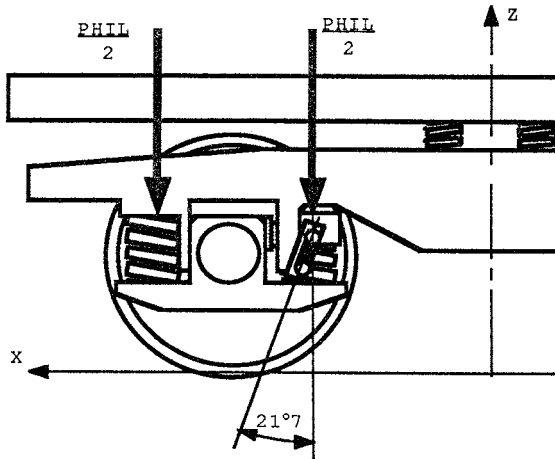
The position of the Lenoir damper on the *left wheel* shown on Fig. 6. The inclined link is bolted to the bogie frame at its lower end
